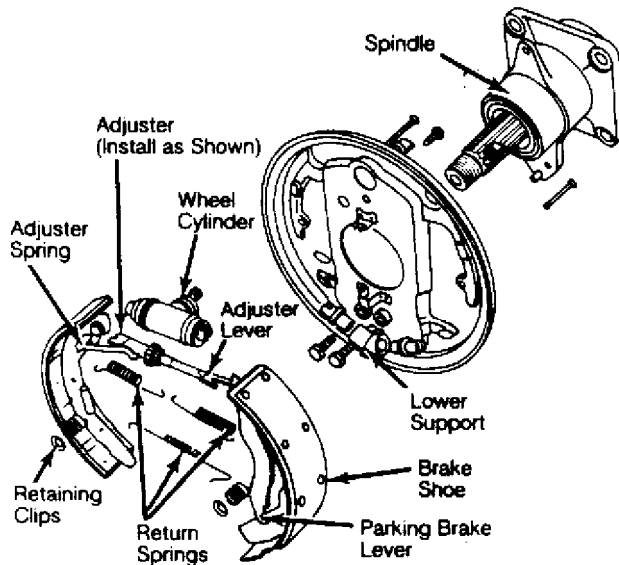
Exploded View of Rear Brake Assembly (Vanagon & Vanagon Syncro)
